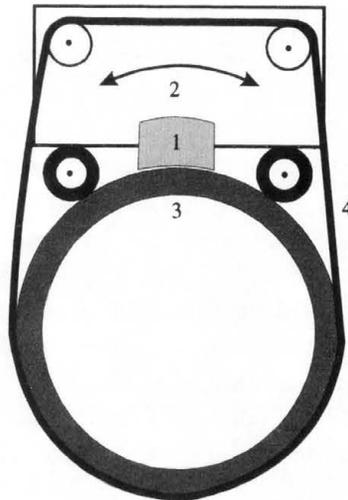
Schematic cross-section of working apparatus: 1 – one of ultrasonic probes, 2 – scanner with rubber rollers below and motor driven teeth rollers above, 3 – tube under test, 4 – rubber belt with teeth.
